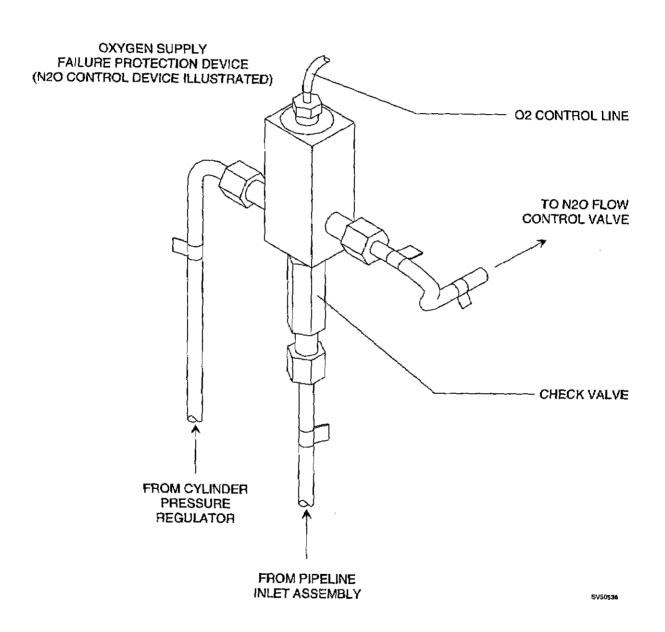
OXYGEN SUPPLY FAILURE PROTECTION DEVICE
